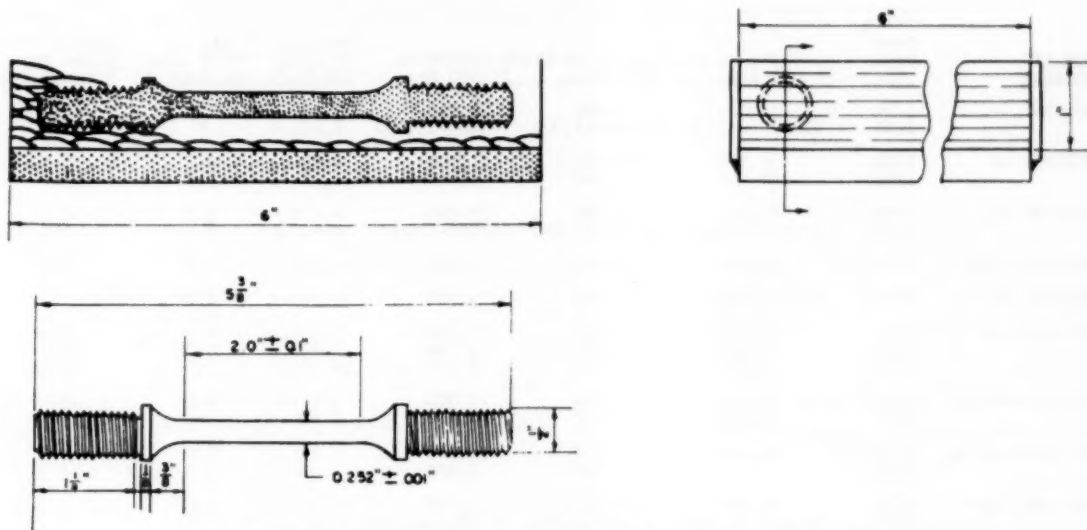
(a) SPECIMEN TAKEN TRANSVERSE TO DIRECTION OF WELD BEADS
